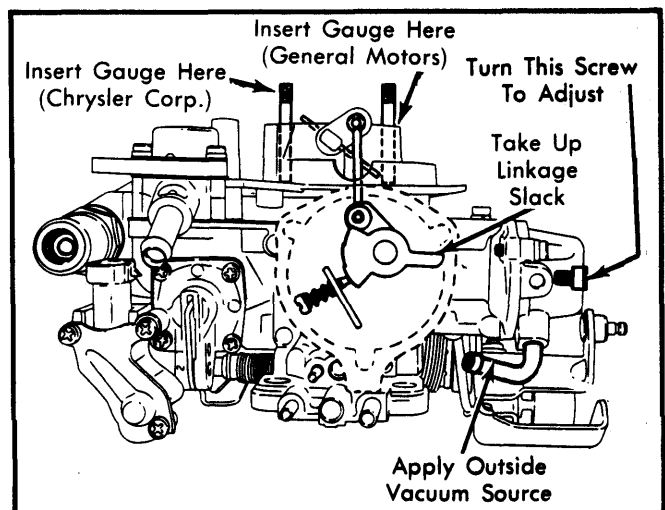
Adjusting Choke Vacuum Break (Initial Choke Valve Clearance)
